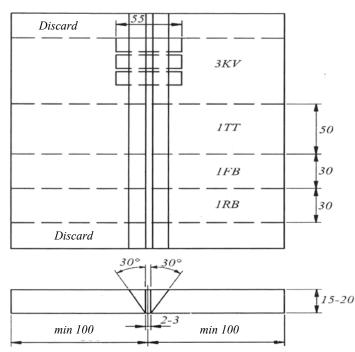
tt weld test assembly when testing electrodes for manual arc welding (test specimens are designated according to Table 4.3.1.1. All dimensions are in mm)
